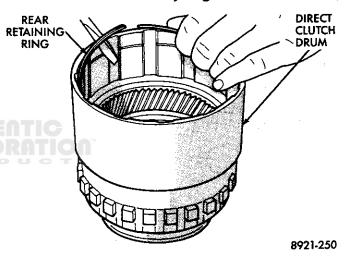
Removing Clutch Drum Rear Retaining Ring
